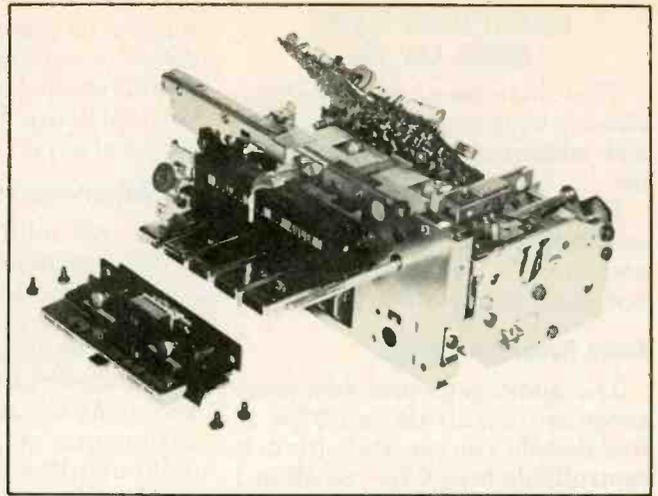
Partially disassembled signal-seeking car radio. (Courtesy of Delco Electronics.)
